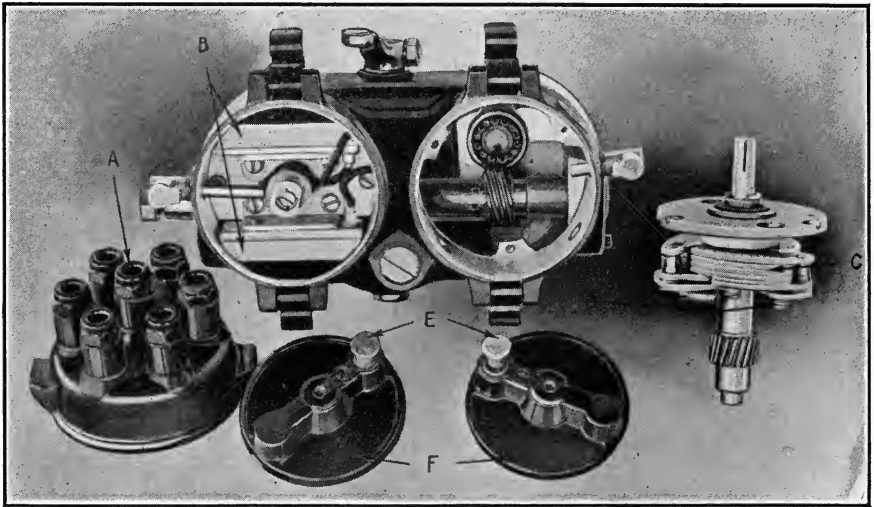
Pierce-Arrow ignition unit showing condenser mounting and driving mechanism.
